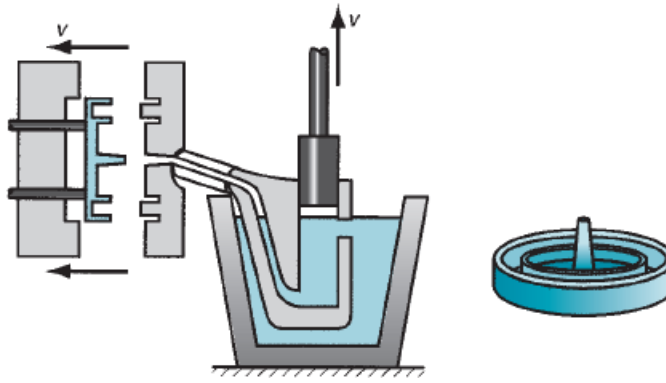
Schematic of a hot chamber horizontal die casting setup.
